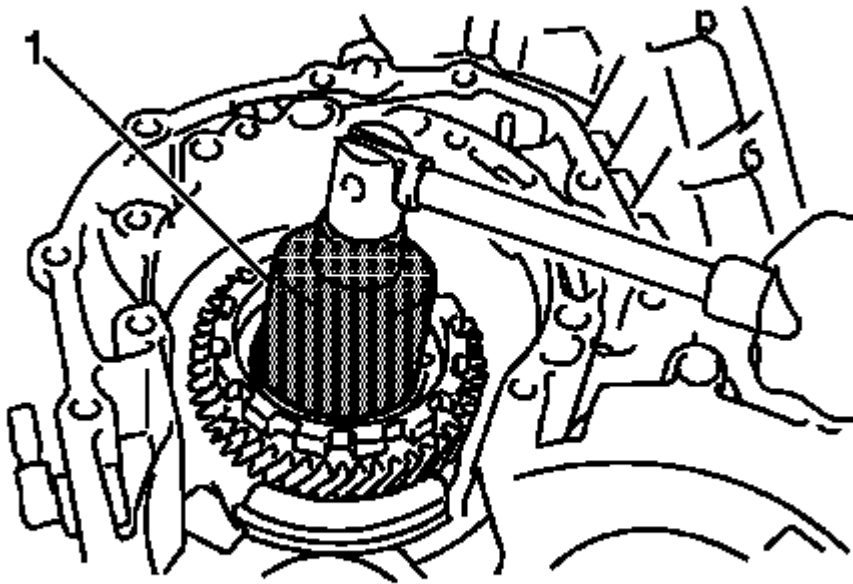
Removing Planetary Ring Gear Nut Using DT 46472
